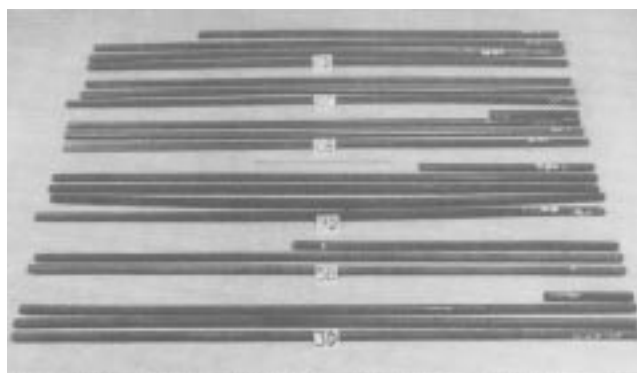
Six tubes produced in the second extrusion campaign. Each of these 51-mm (2-in.) tubes had been cut into 3.7-m (12-ft) lengths. Note meter stick behind Tube 9D; this tube, made from a billet 0.66 m (26 in.) long, had an overall length of 15.8 m (52 ft), the longest of all extrusions.
